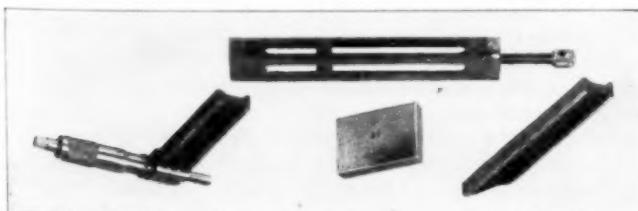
PARTS OF ADJUSTABLE MICROMETER USED IN COMBINATION WITH GAGE BLOCKS OF DIFFERENT SIZES
